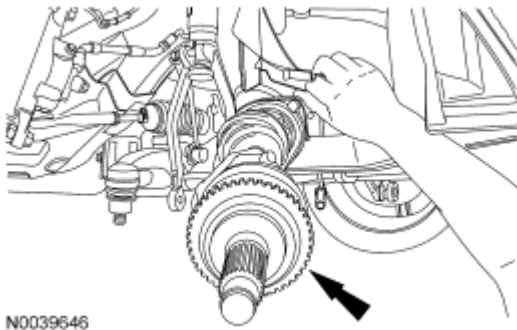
Pulling Strut Forward & Removing Halfshaft From Damper Fork
